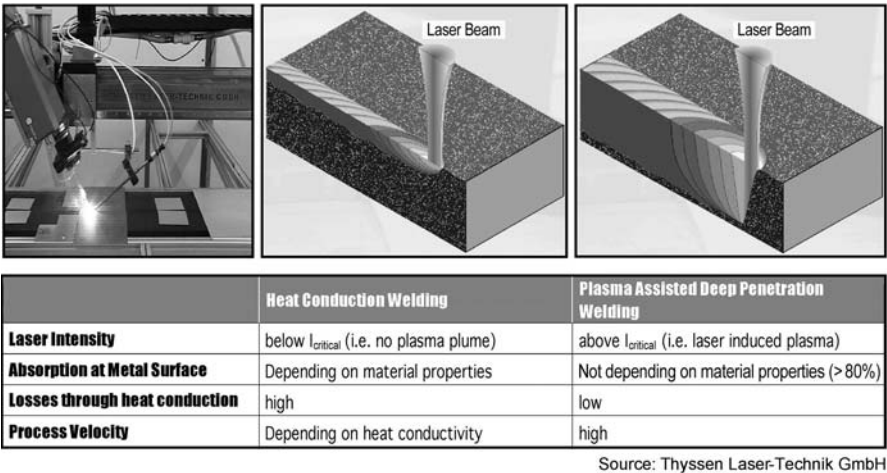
Laser welding processes for joining magnesium sheet
